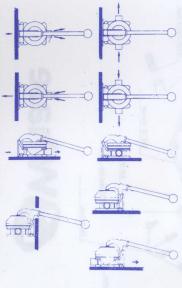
Some of the many mounting possible with the standard pump. arrangements
